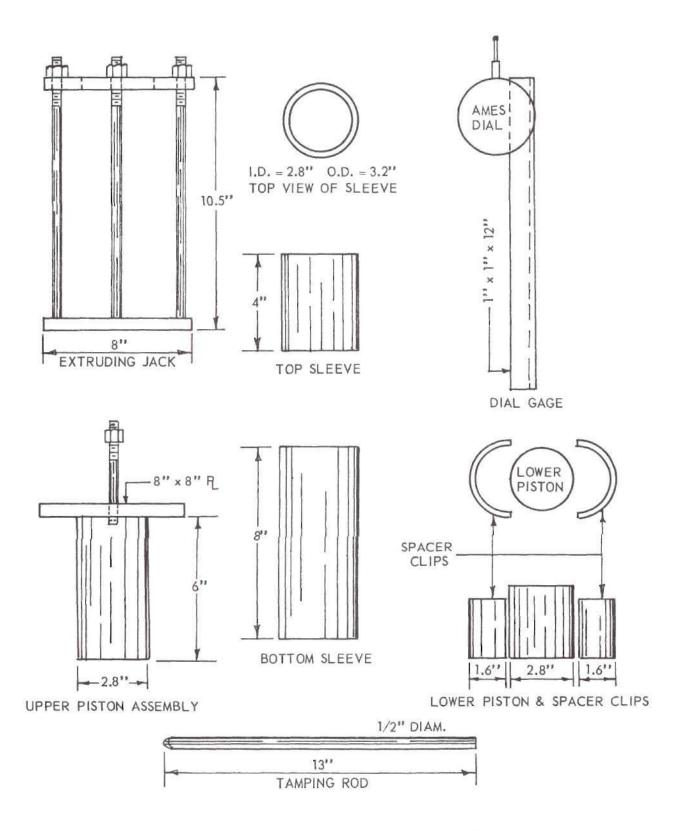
Equipment Used in Molding Samples for Strength Tests.
